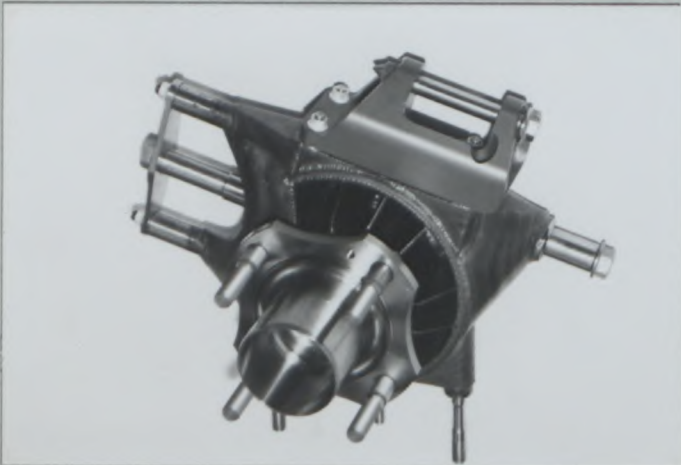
(LOWER ARM : TYPE 1)
